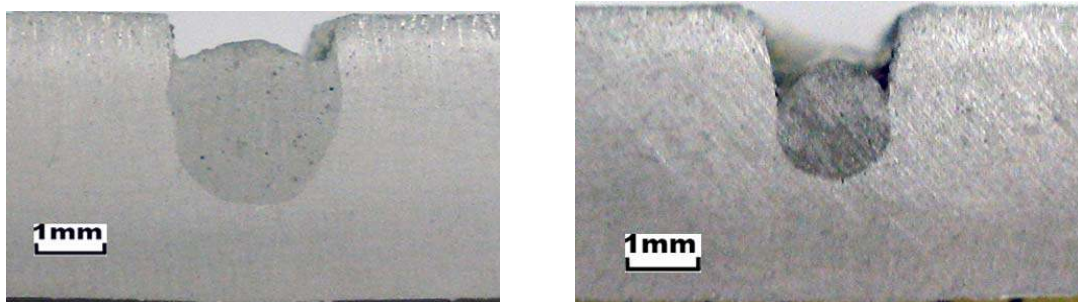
, Welding cross section of GMAW (left) and DB-GMAW (Right)
